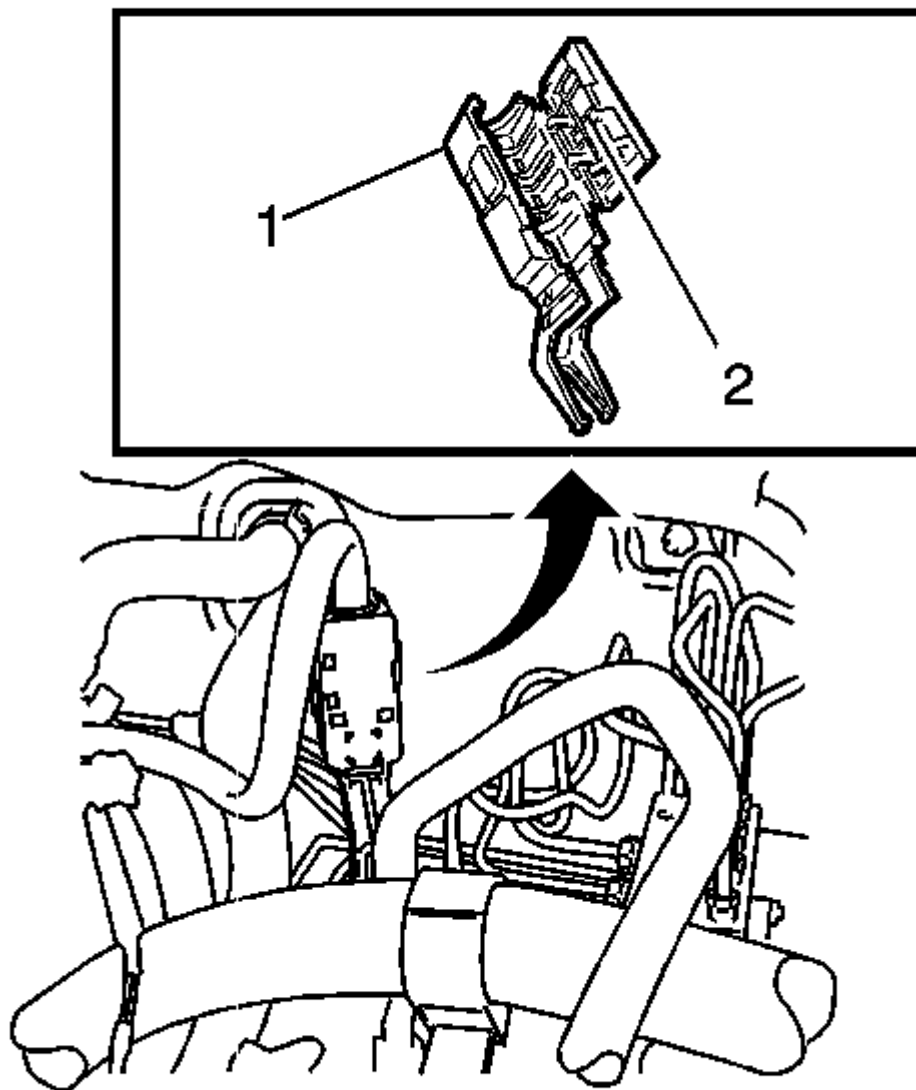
Identifying Fuel Pipe Clamp & Claw
